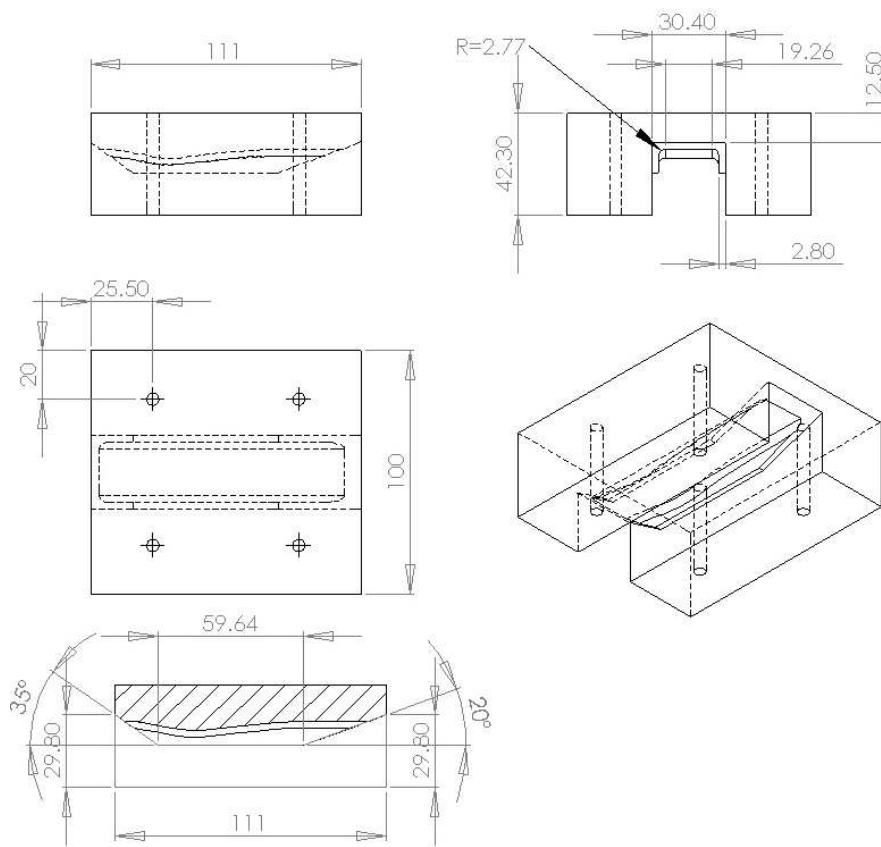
Mach 1.5 nozzle design (all dimensions in (mm))
